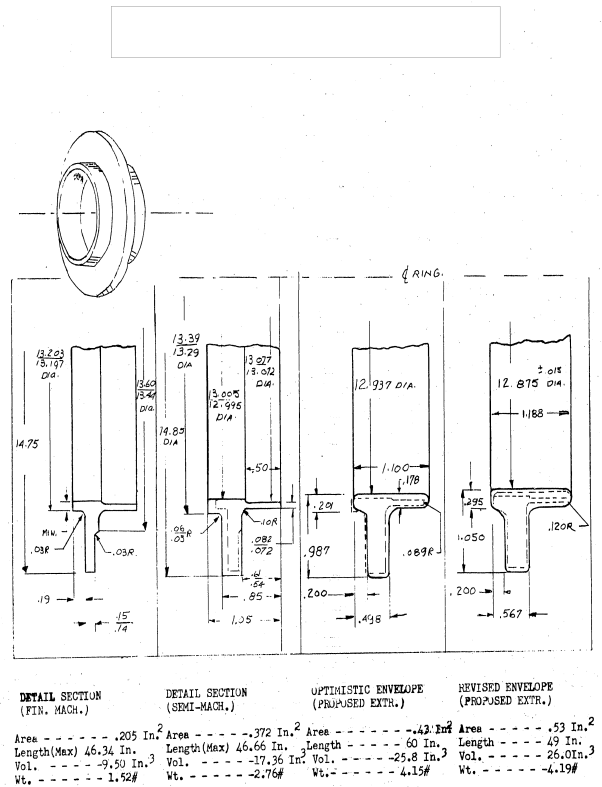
PRODUCTION EXTRUSION SHAPE FOR P/N 226956.
